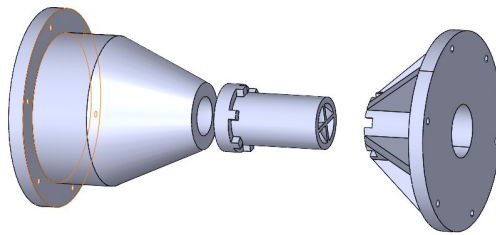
Exploded CAD view from the nozzle to the inset and its support.
